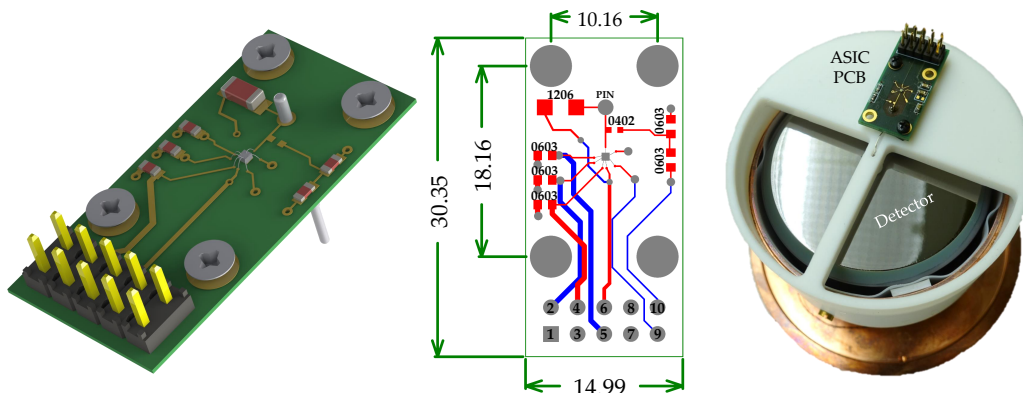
Printed circuit board hosting the CUBE ASIC. The left figure shows a three-dimensional rendering of the board. The figure in the center shows the dimensions of the board (in mm), and the footprints for the electronic components (in inch). Traces on the top and bottom surface are indicated by the red and blue solid lines, respectively. The right figure shows the ASIC board mounted on a PTFE structure above the PPC HPGe detector. Published in [16].
